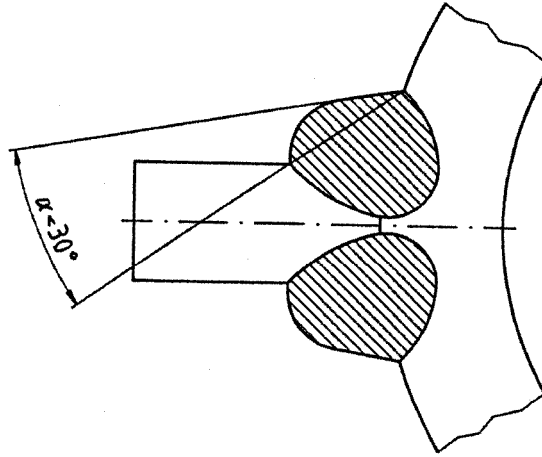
Allowable excessive convexity for fin to tube welds
